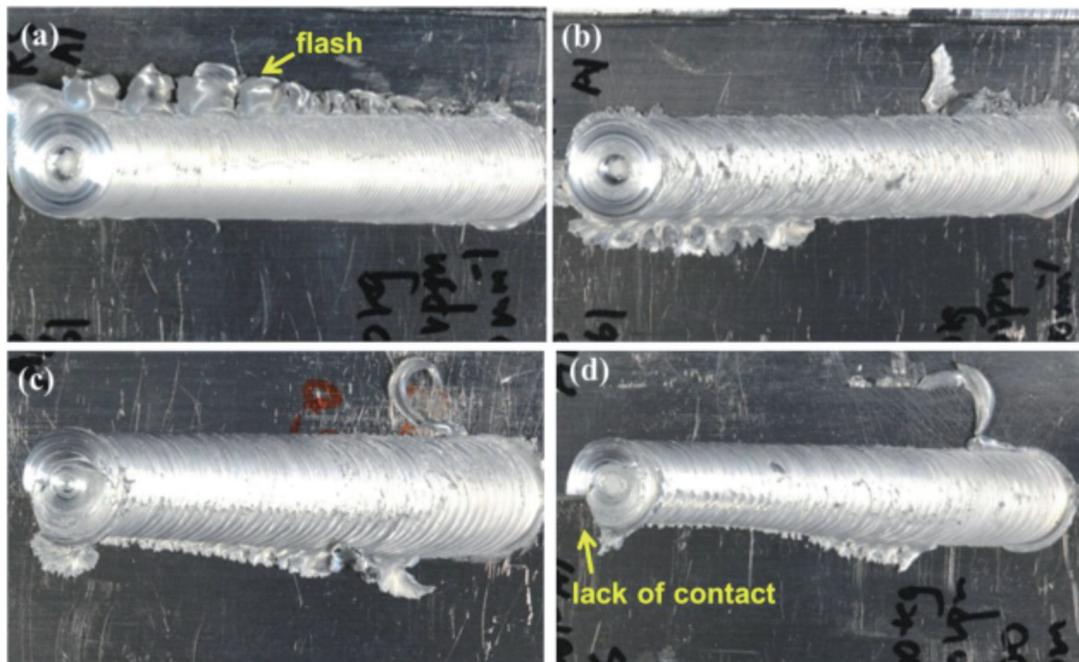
Friction Stir Welded joints obtained at a constant rotational speed of 800 rpm and varying traverse speeds of 400, 600, 800, 1000 mm/min [13].
